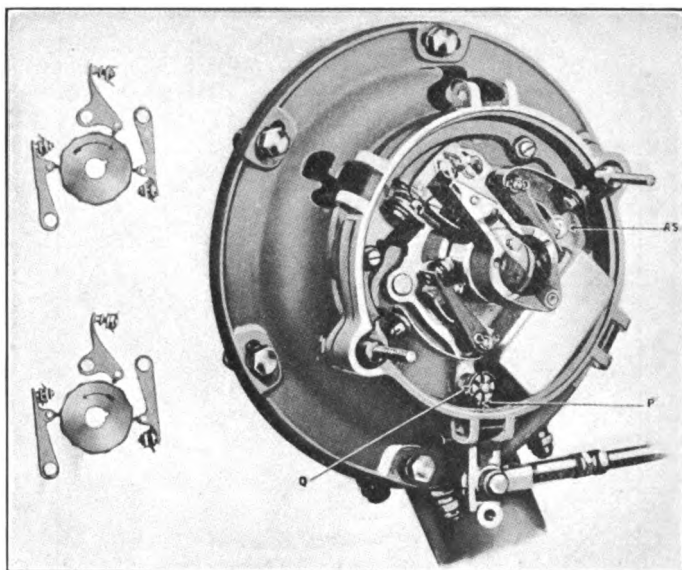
Liberty distributor cup, assembly, cam and breakers.
